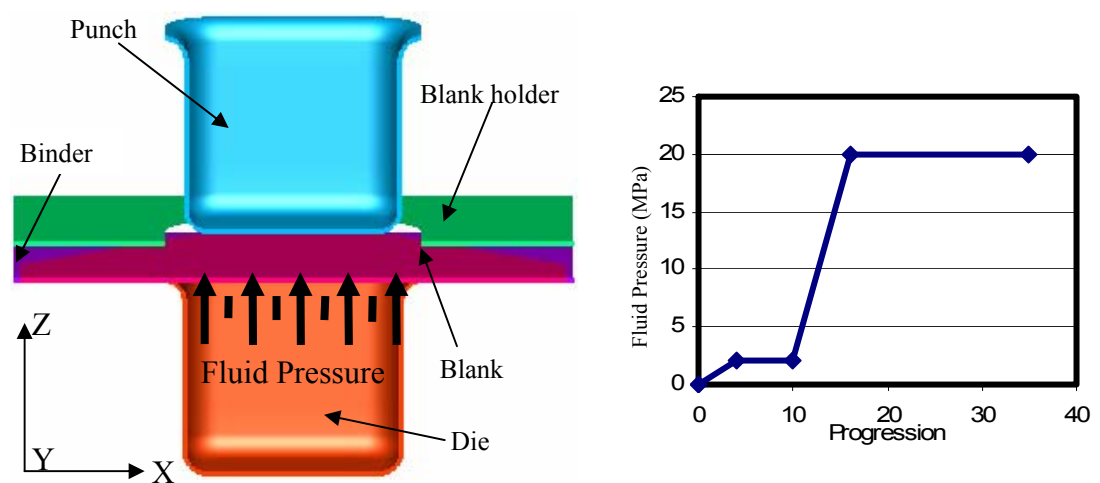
Hydro-mechanical deep drawing (aquadrawing) process setup and counter pressure exerted by fluid on to the workpiece
